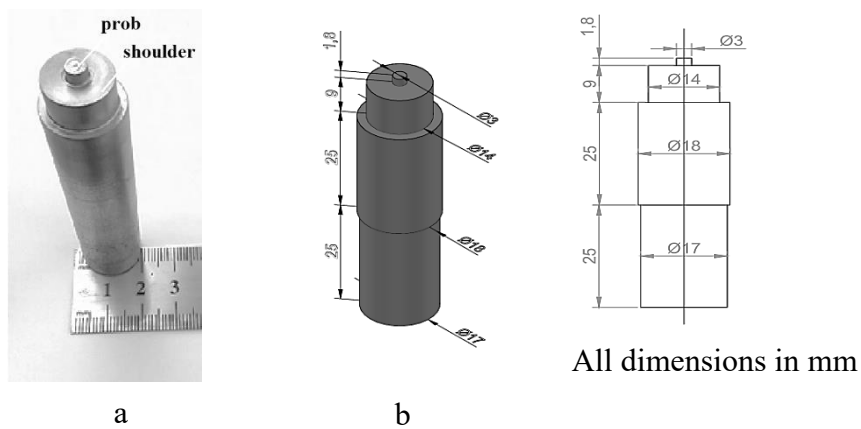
Cylindrical tool (a) photograph and (b) Schematic
